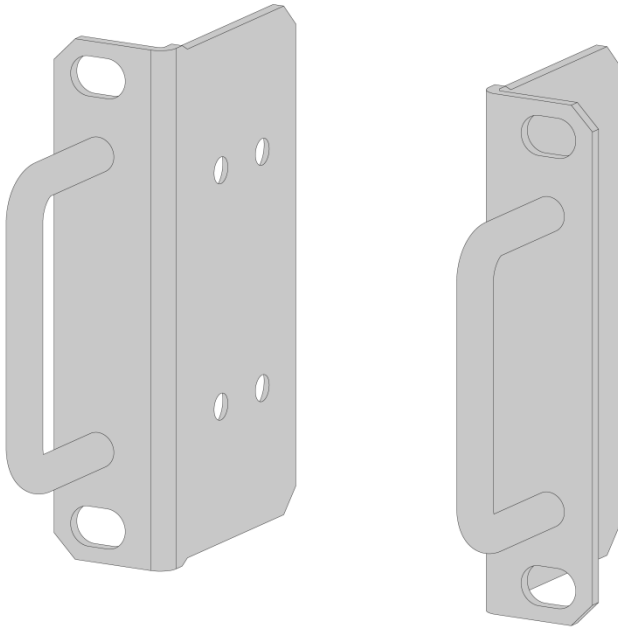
2U mounting brackets provided with the S9825-128B switch
